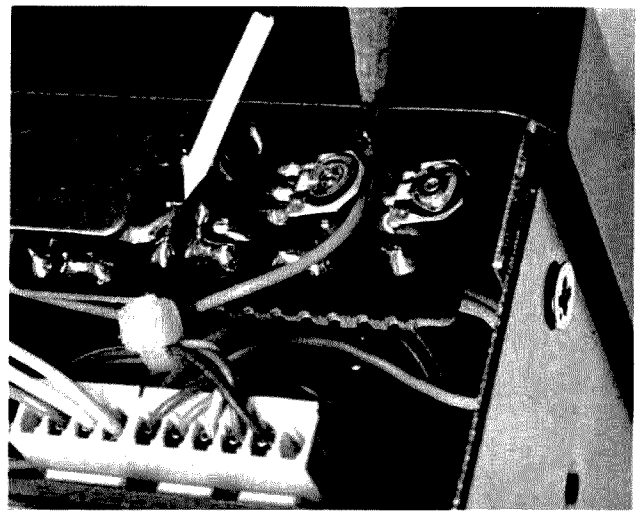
Photo C. RIT board. Arrow shows where REC 8-V wire should be connected. Between the two capacitors, green wire SQ is soldered to the board.
